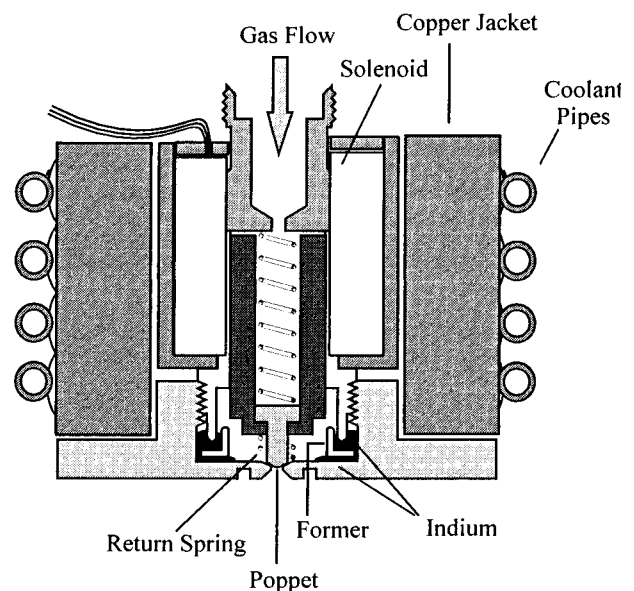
Section through the cooled valve showing details of the indium seal, poppet, and solenoid assembly.
